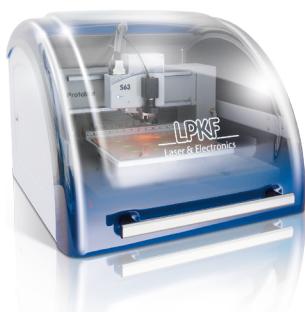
A mechanical or laser prototyping system brings PCB fabrication capability inside a company, for improved precision and speed when creating prototypes.
